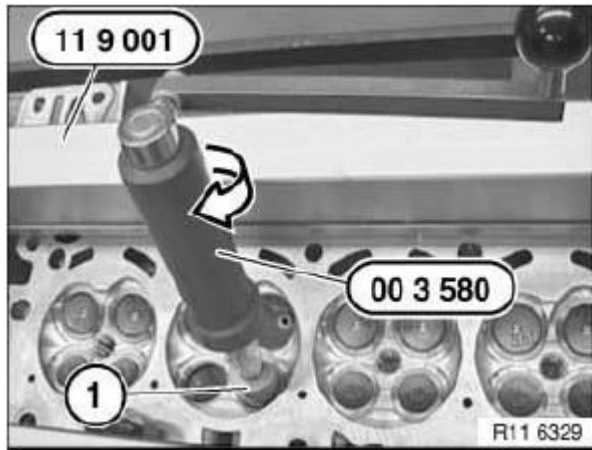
Identifying Special Tools (11 9 001), (00 3 580) And Valve Seat Milling Cutter
